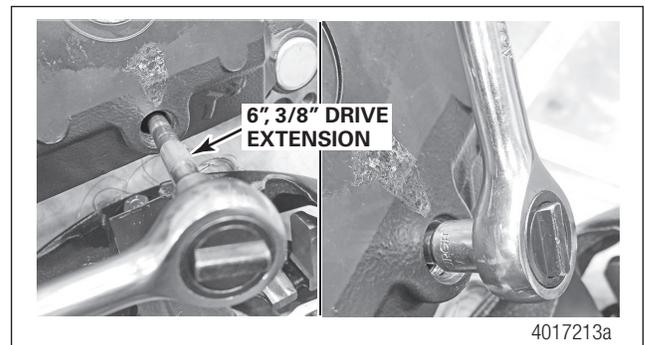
Use wrench with 6", 3/8-drive extension to rotate adjuster stem.
